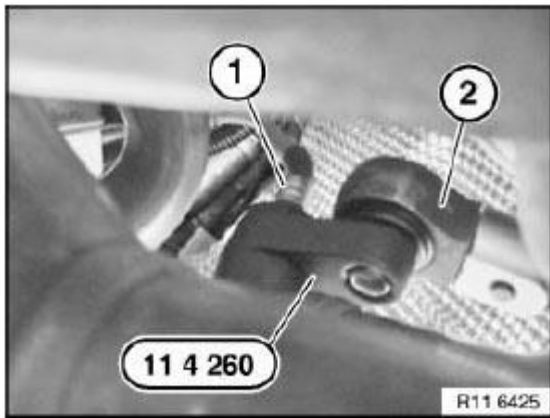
Removing Lambda Oxygen Control Sensor Using Special Tool 11 4 260
